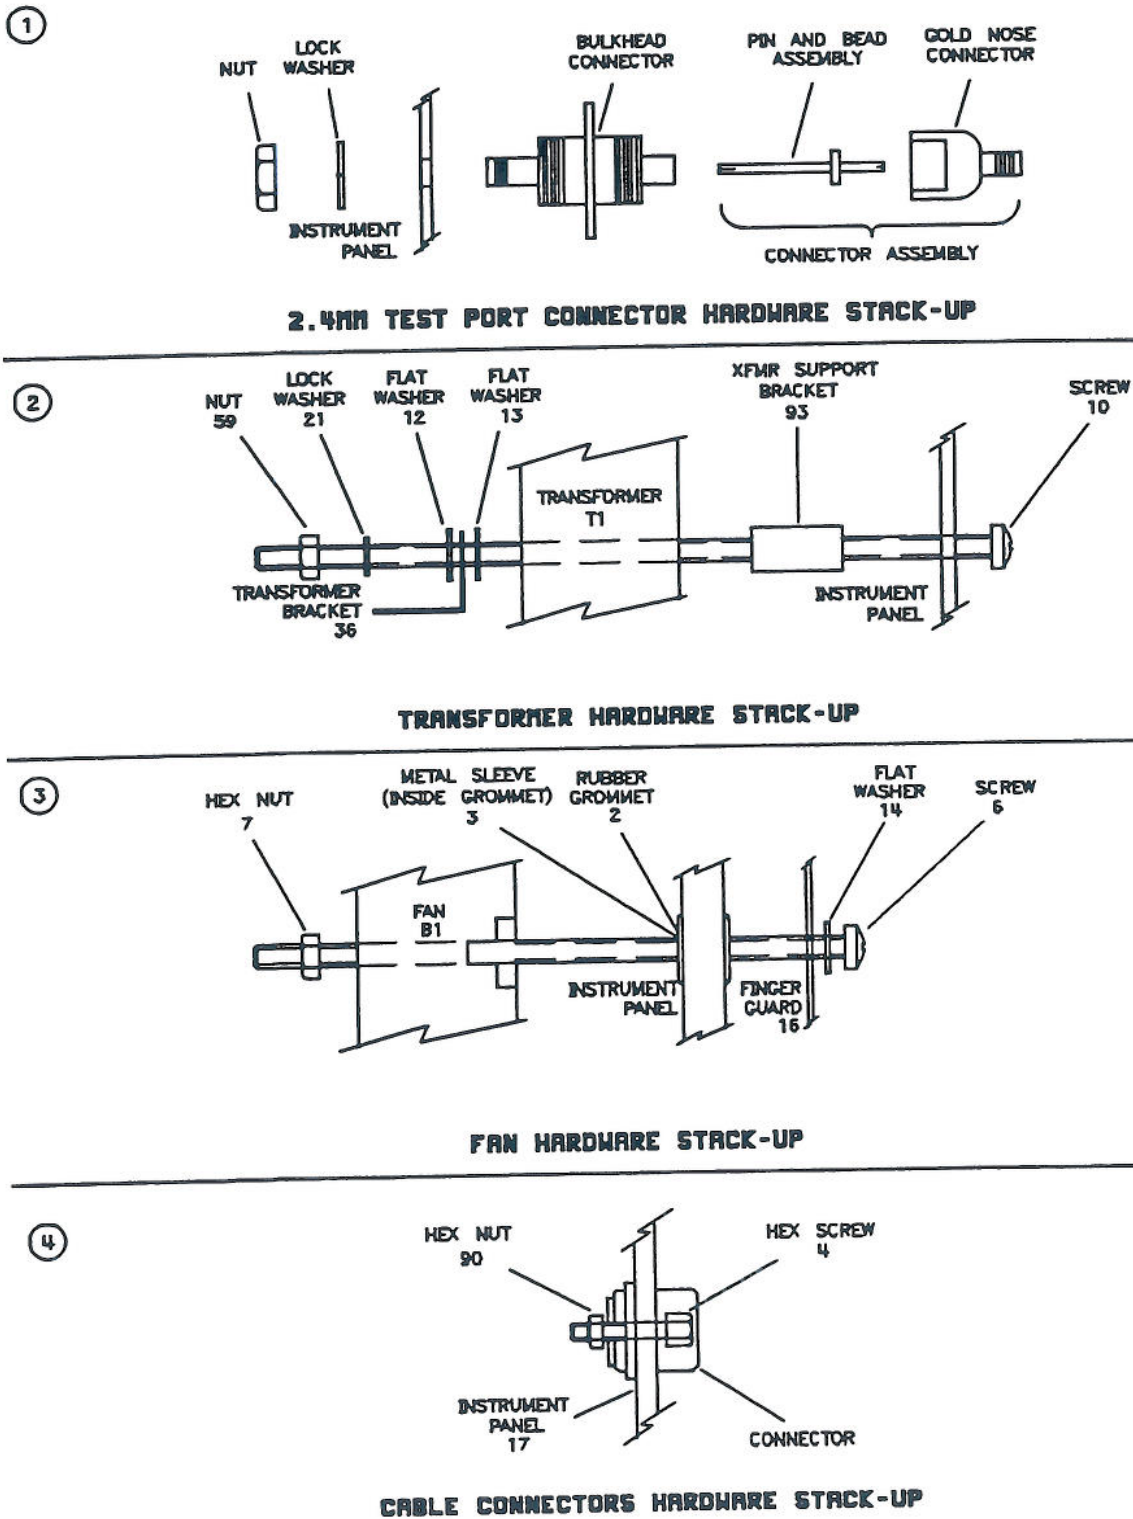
Rear Panel Miscellaneous Parts, Detailed Views
